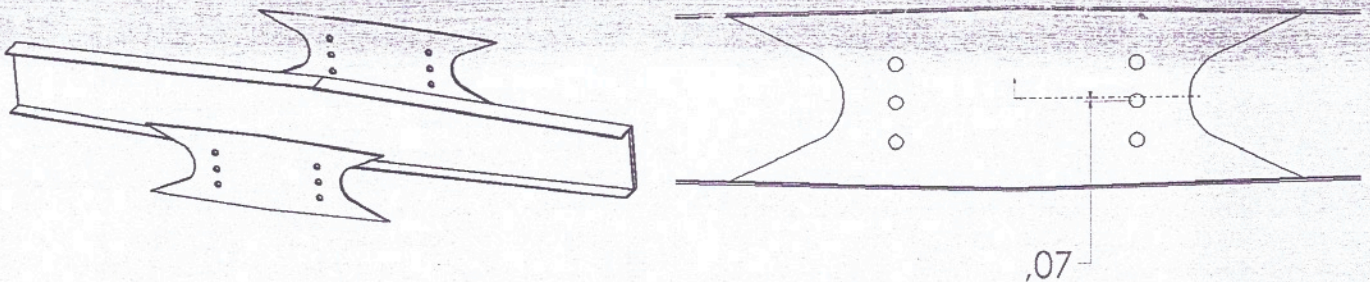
Rear view of stabilizer spar showing installation of spar plates, left, and front view of plate showing proper offset for holes
